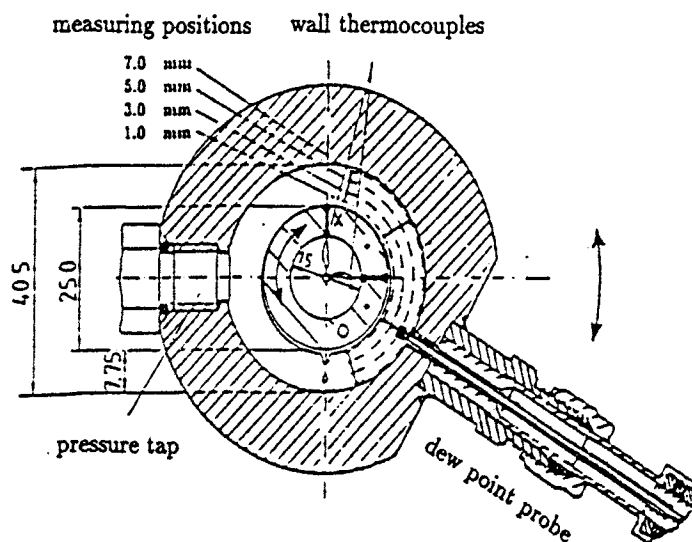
Cross section of the instrumented segment in the single tube heat exchanger
